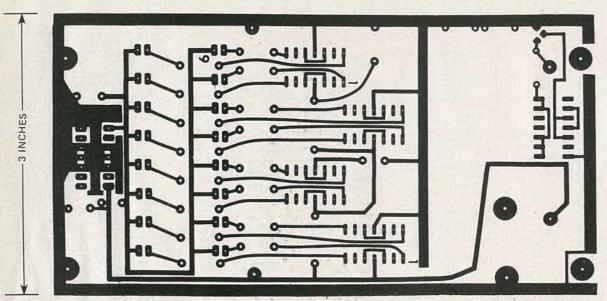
"FOIL-SIDE" of display board. Note that, while board is double-sided, holes need not be plated-through.
